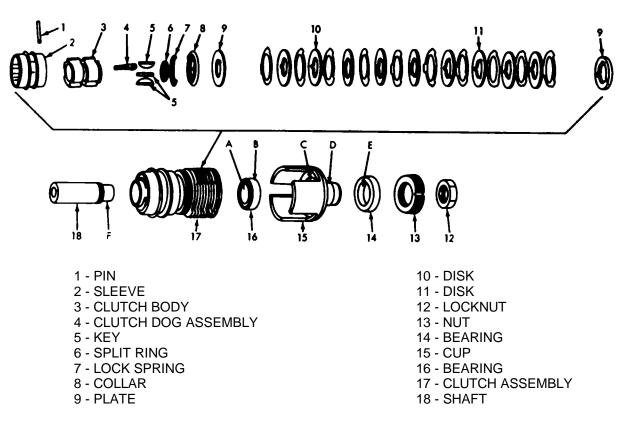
Disassembly or assembly of clutch assembly and related components.
